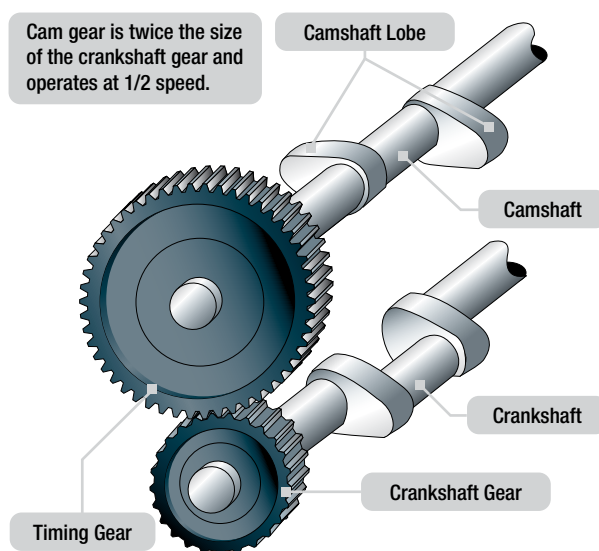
Cam drive mechanism opposed type aircraft engine.
